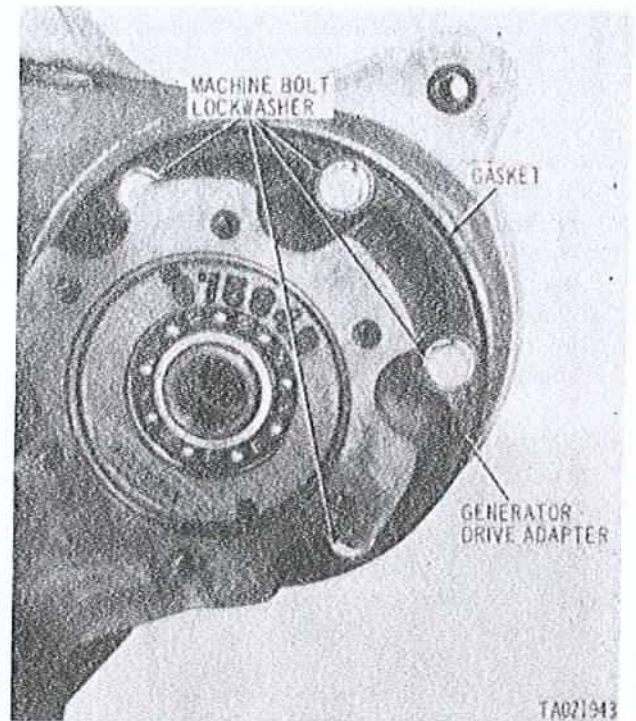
Removing or installing generator drive adapter and associated parts, model AVDS-1790-2C engine.
